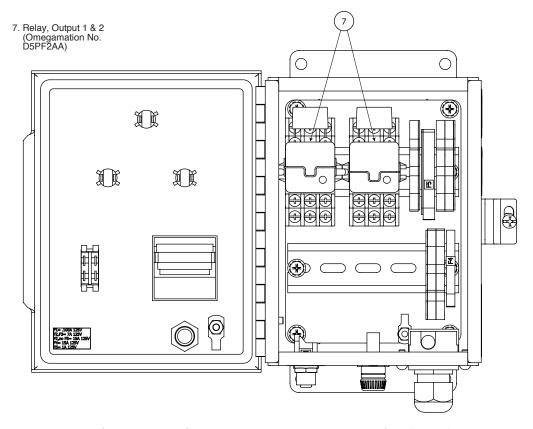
CNi-CB120SB Components, Front View (Open)
